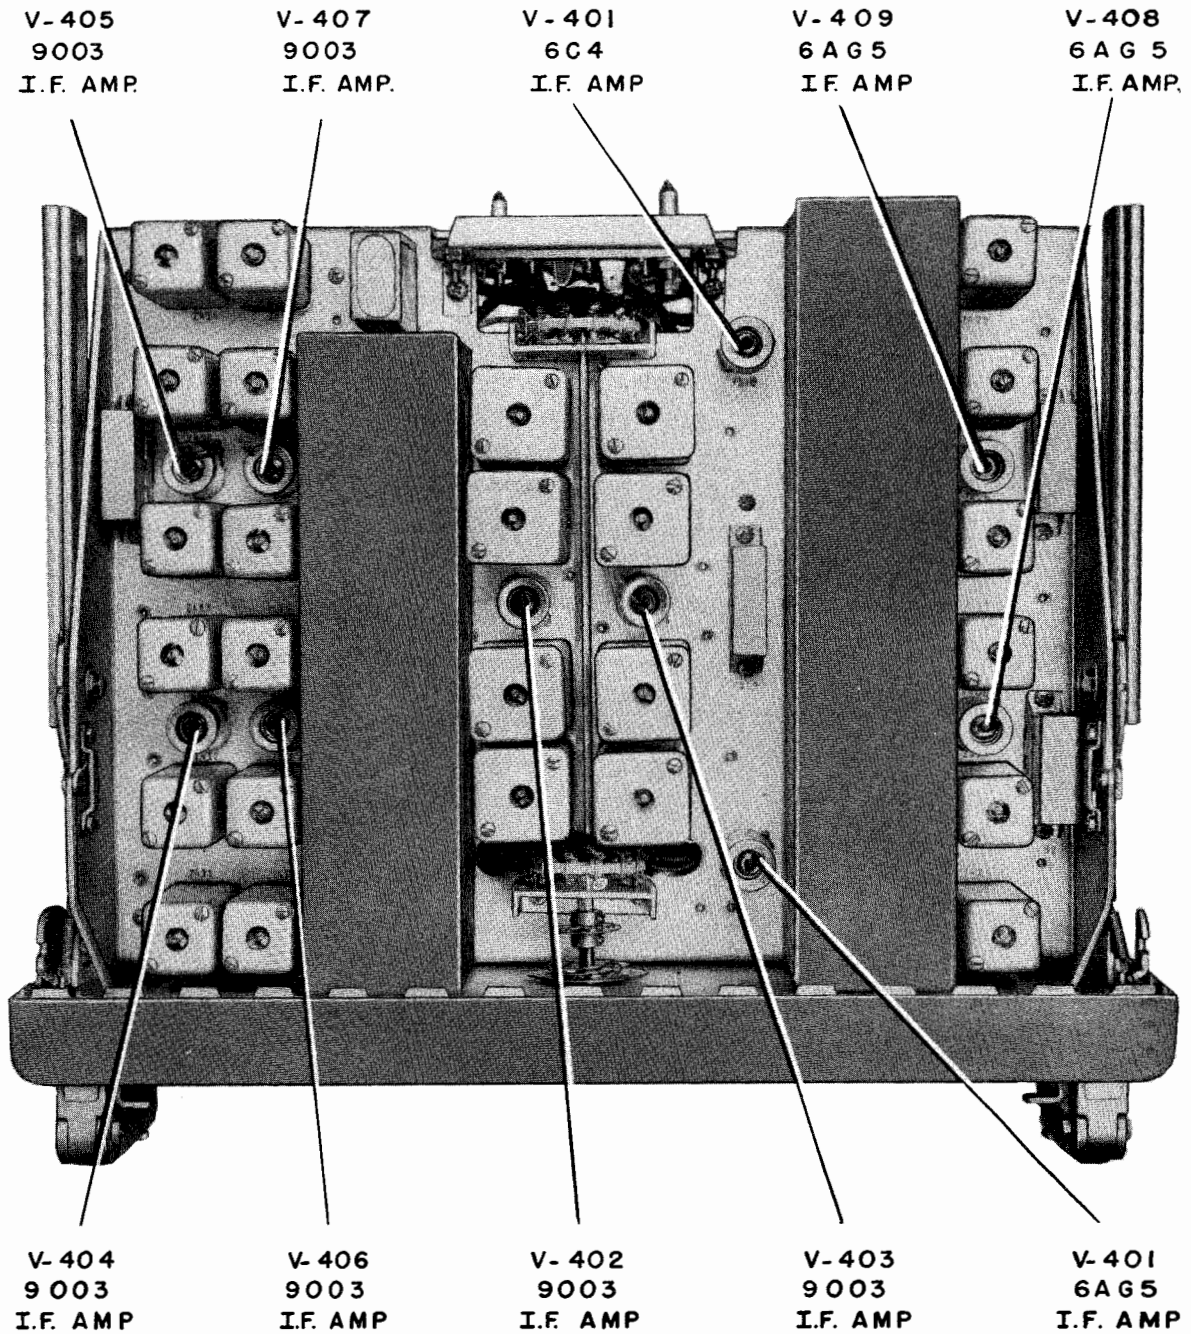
Tube Locations, Filter Assembly F-99/FRR-24
